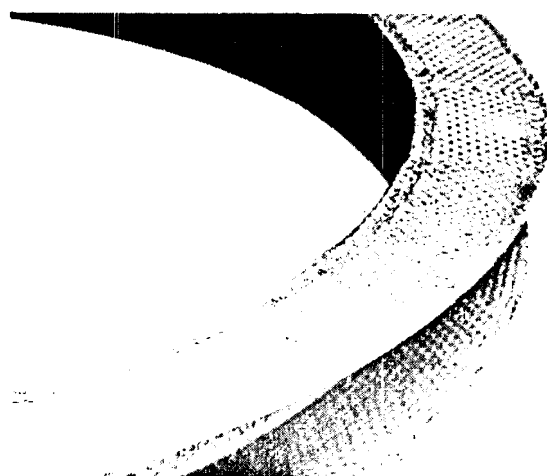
Close-up of Carbon-Carbon Mount Ring showing Details of Lay-up
